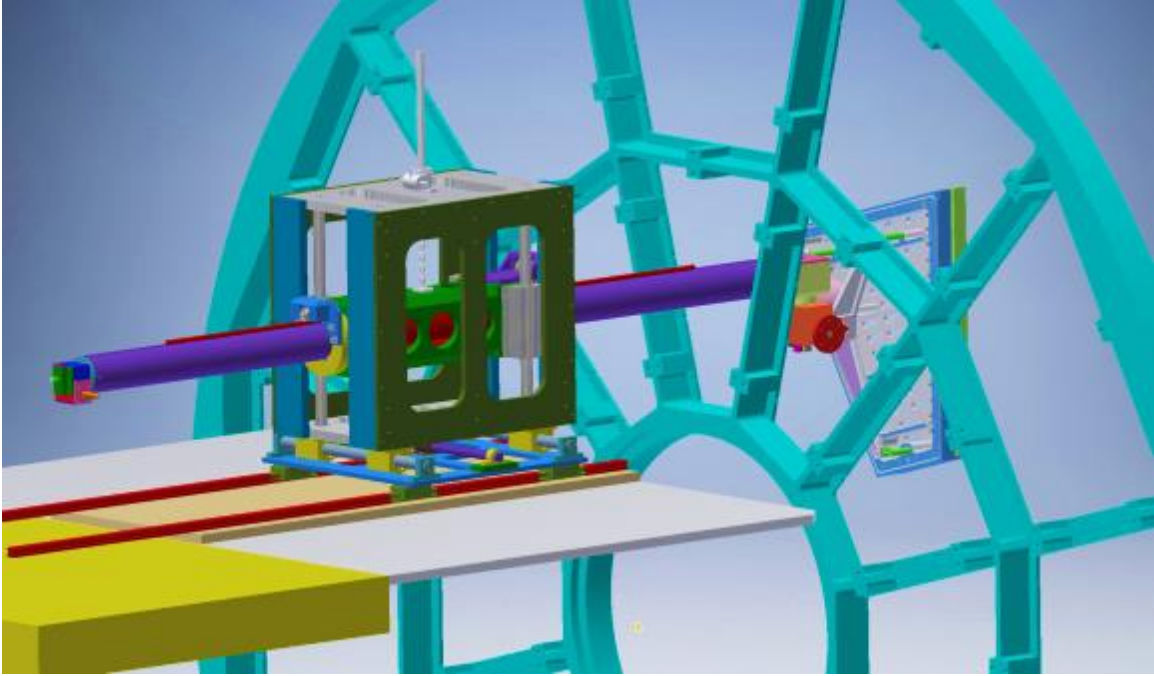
Schematic views of the sector manipulation tool placing an inner sector assembly through the opening at the 12 o'clock position of the TPC end-wheel.
